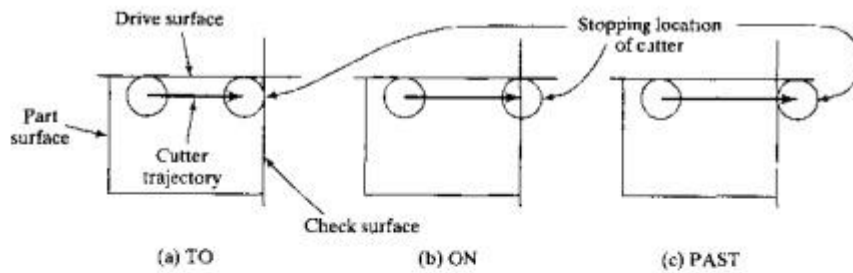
Use of APT modifier words in motion statements: (a) TO moves the tool into initial contact with the check surface; (b) ON positions the tool center on the check surface; and (c) PAST moves the tool just beyond the check surface.
